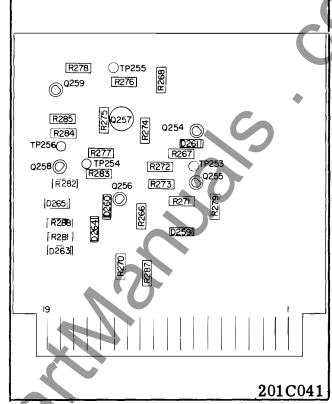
Component Location of the Arming Board for the Type STU Relay.
